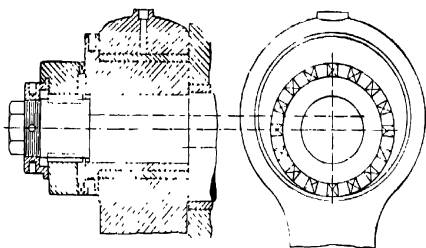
Stroke adjustment for Schuler end-wheel press
